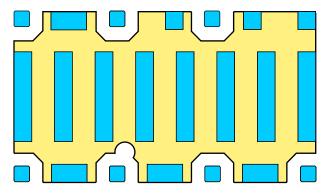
Solder Stencil Superposed on ACFM-7103 Bottom Metal Pattern. (top view)
